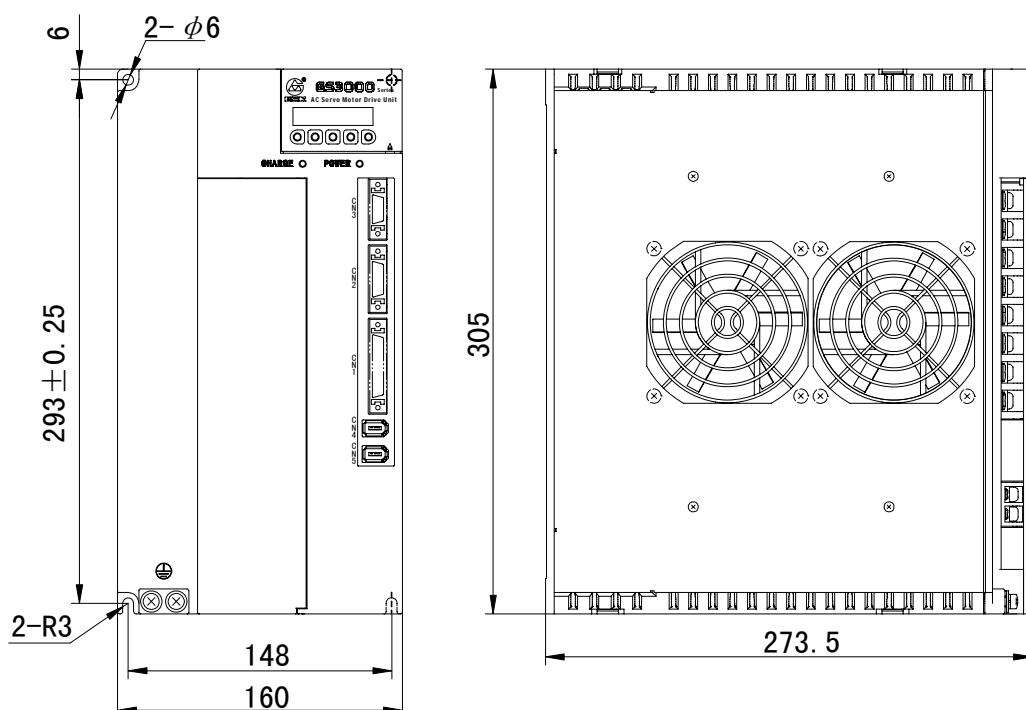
GS3100, GS3148, GS4100, GS4148 Series installation dimension (Unit: mm)
